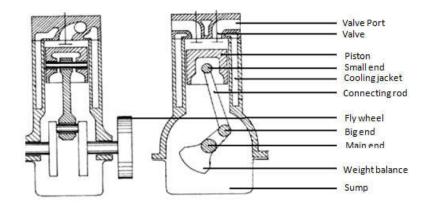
Insight of a Single Cylinder Engine (Courtesy: SPR Ltd)
